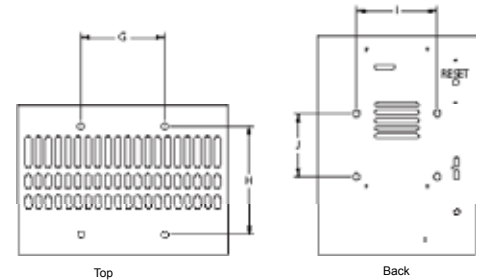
THREADED ROD (3/8 - 16) ATTACHMENT POINT DIMENSIONS
